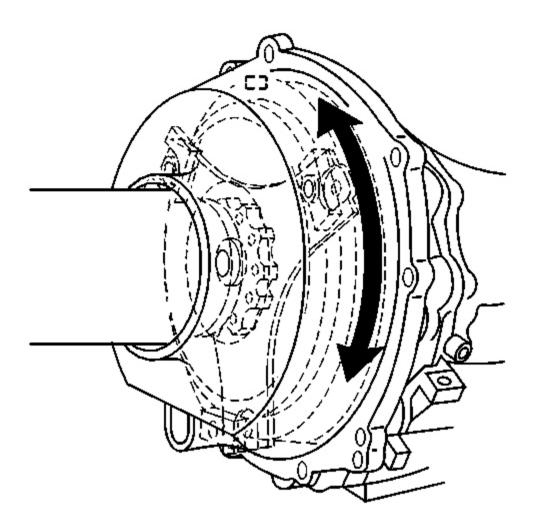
Torque Converter Bolt Holes & Driveline Support Assembly Access Hole Courtesy of GENERAL MOTORS CORP.
